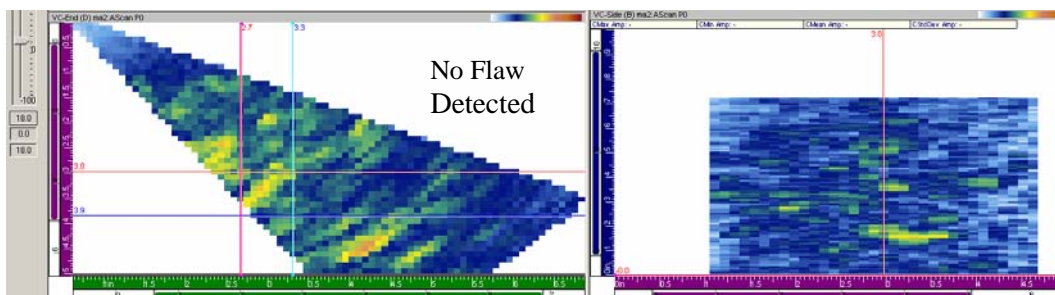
Mechanical Fatigue Crack in Specimen MPE-3 As Viewed from CCSS Side at 1.0 MHz Judged To Be Not Detected
